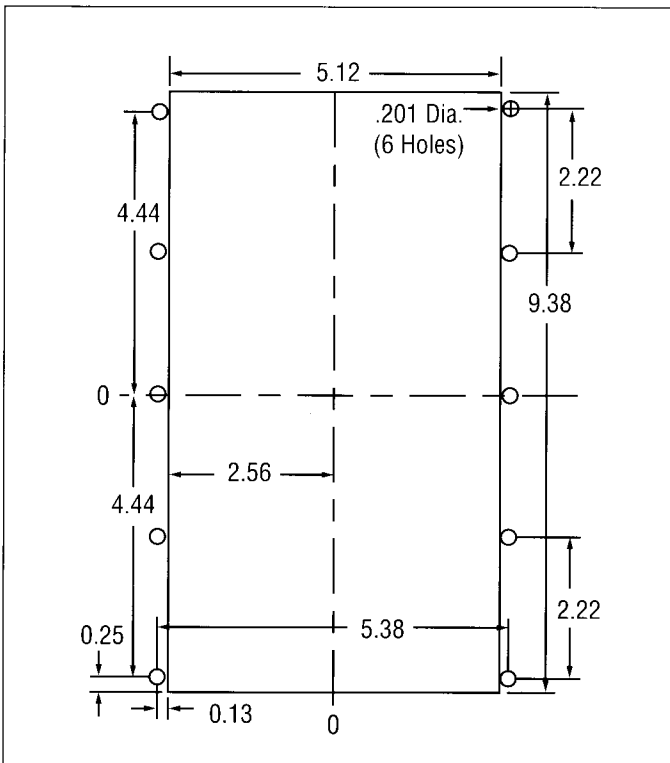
Cutout Dimensions and Drilling Pattern (inches)
